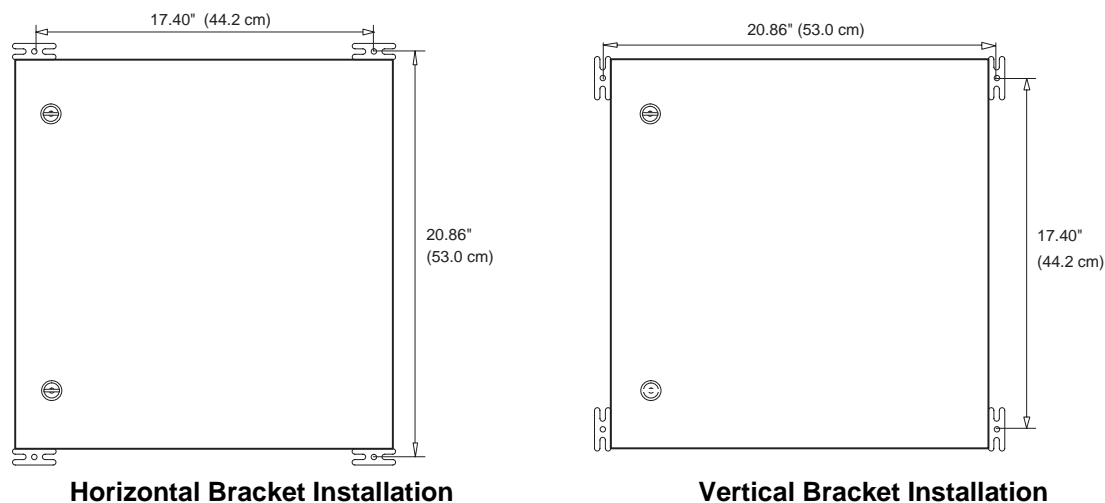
Large NEMA 4 Housing - Installation Dimensions
